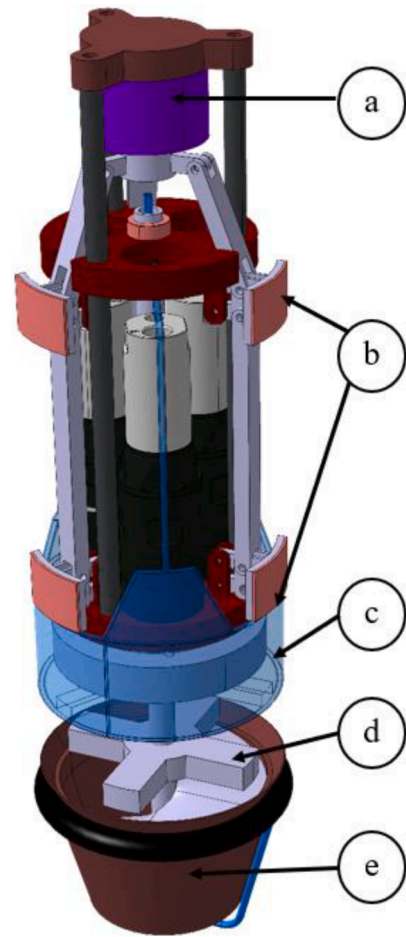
Cutting system for in-bore operation and main components: (a) pneumatic cylinder to engage the friction pads, (b) friction pads of the supporting system, (c) air diffuser to push down the chips and cool down the cutting area, (d) cutting cross on which cutting tool bits and the feeding system are located (not drawn), (e) chip collector with air cushion and screw compactor. The three pneumatic motors are in grey and blank in the central part of the system.
